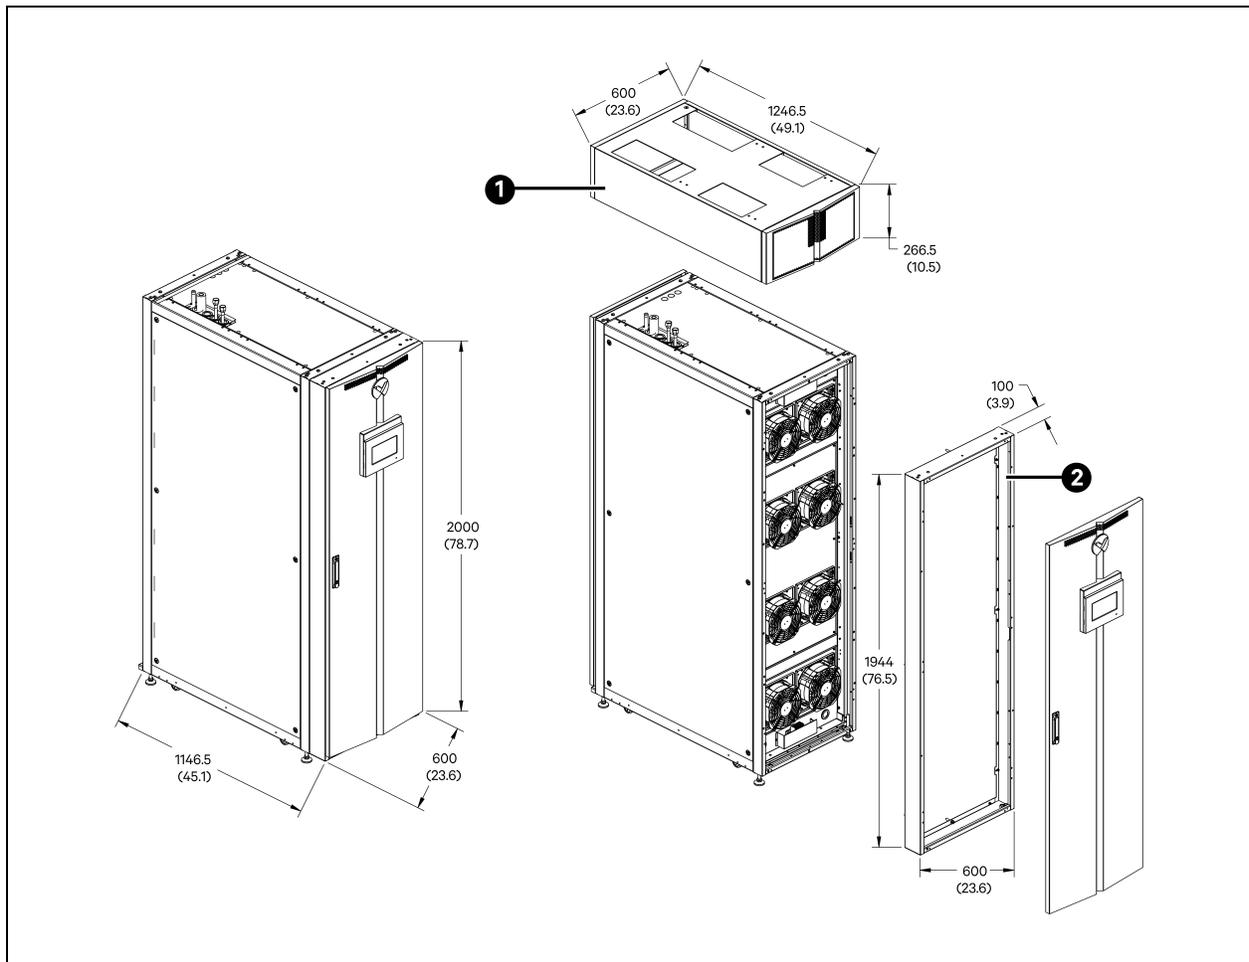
CoolPhase Row CRD030 - Dimensions of the Top Frame and the Front Frame
